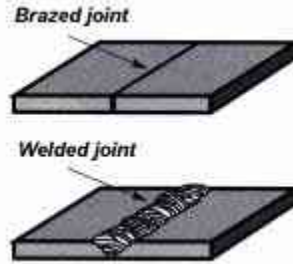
Brazed joint and welded joint (<http://www.societyofrobots.com>)
